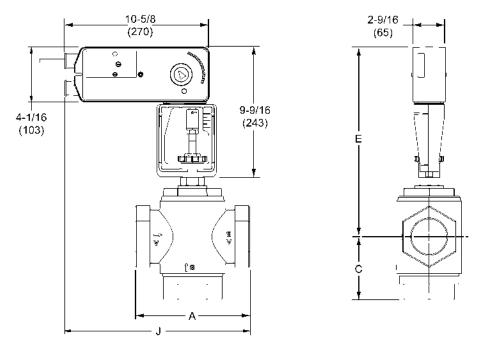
MX61-720X with 2-1/2" or 3" 3-Way Screwed Globe Valve.
